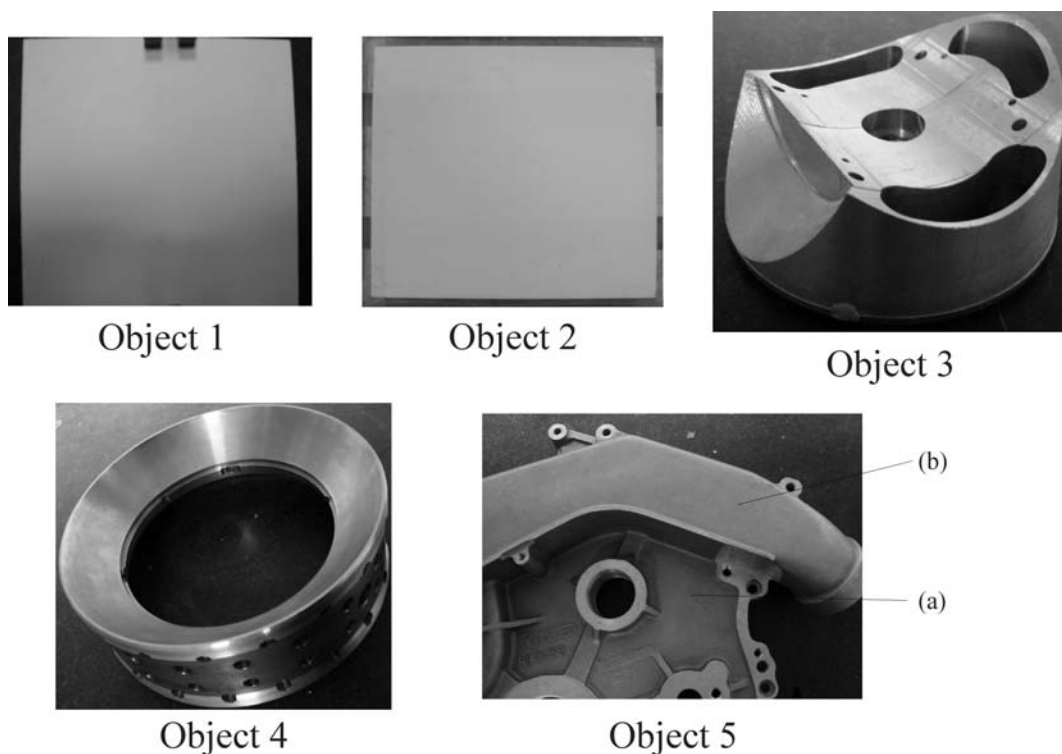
Objects used for measurement: (1) phase to height calibration plane; (2) aluminium oxide plate; (3) machined aluminium block; (4) machined stainless steel ring; (5) cast aluminium block, with two surface areas of different roughness indicated.
